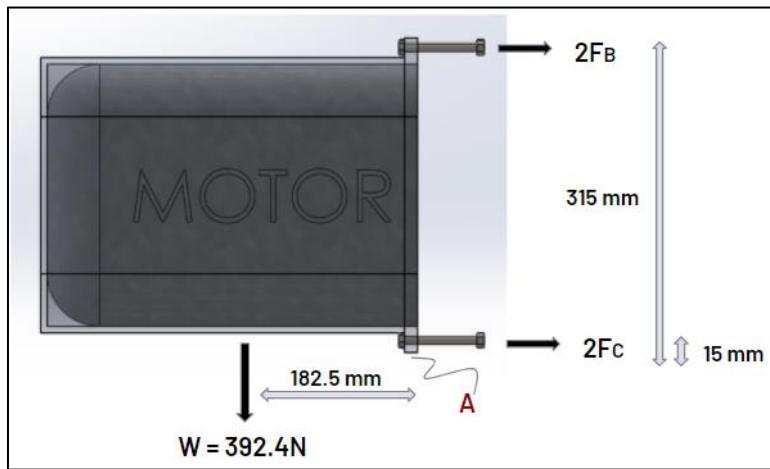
Force Analysis on Bolts Supporting the Motor and Its Casing
